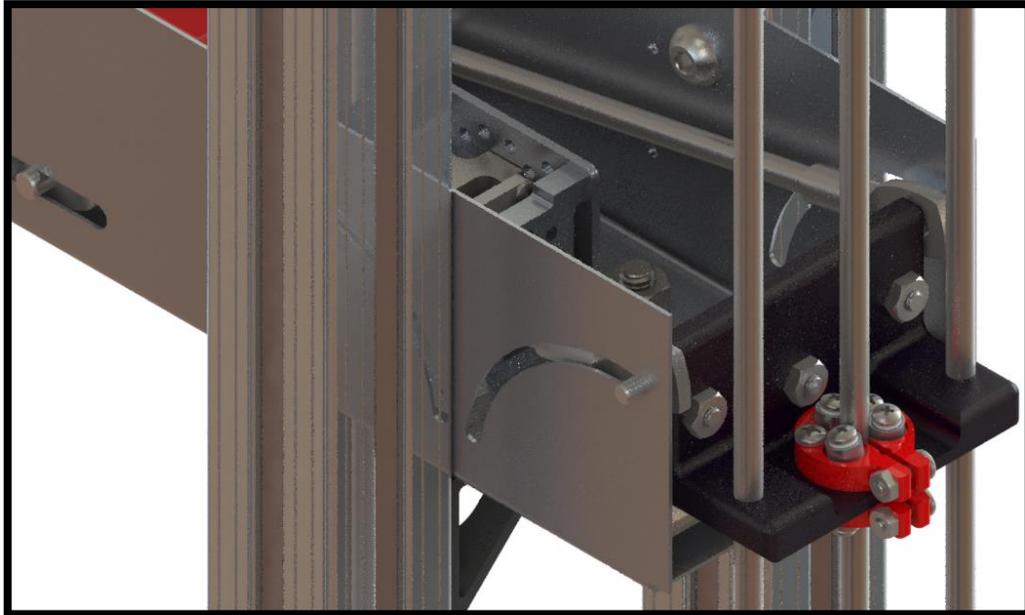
Threadless ball screw assembly mounted on u-shaped channel.
